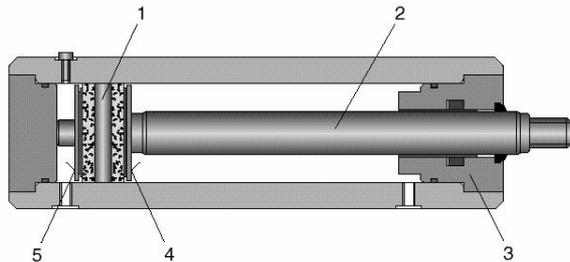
Linear hydraulic engine with rod and piston [7]: 1 – piston; 2 – rod; 3 – guiding element; 4, 5 – piston surfaces.
